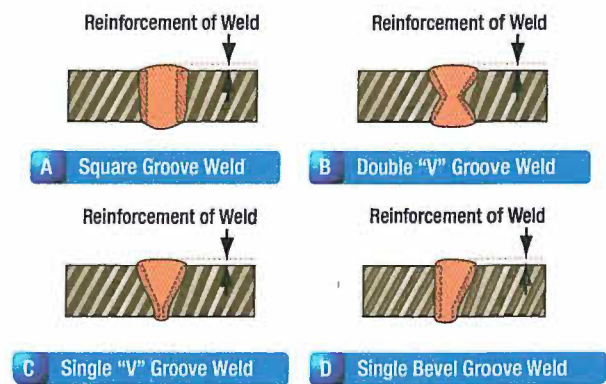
Groove welds on butt joints in the flat position.
